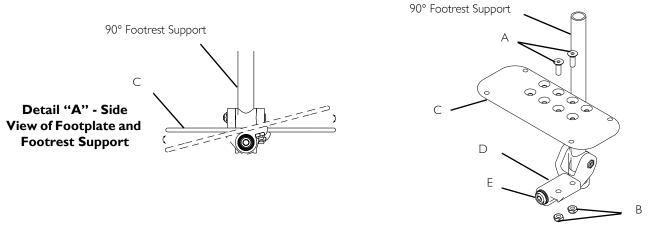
Adjusting Adjustable Angle Flip-Up Footplates
